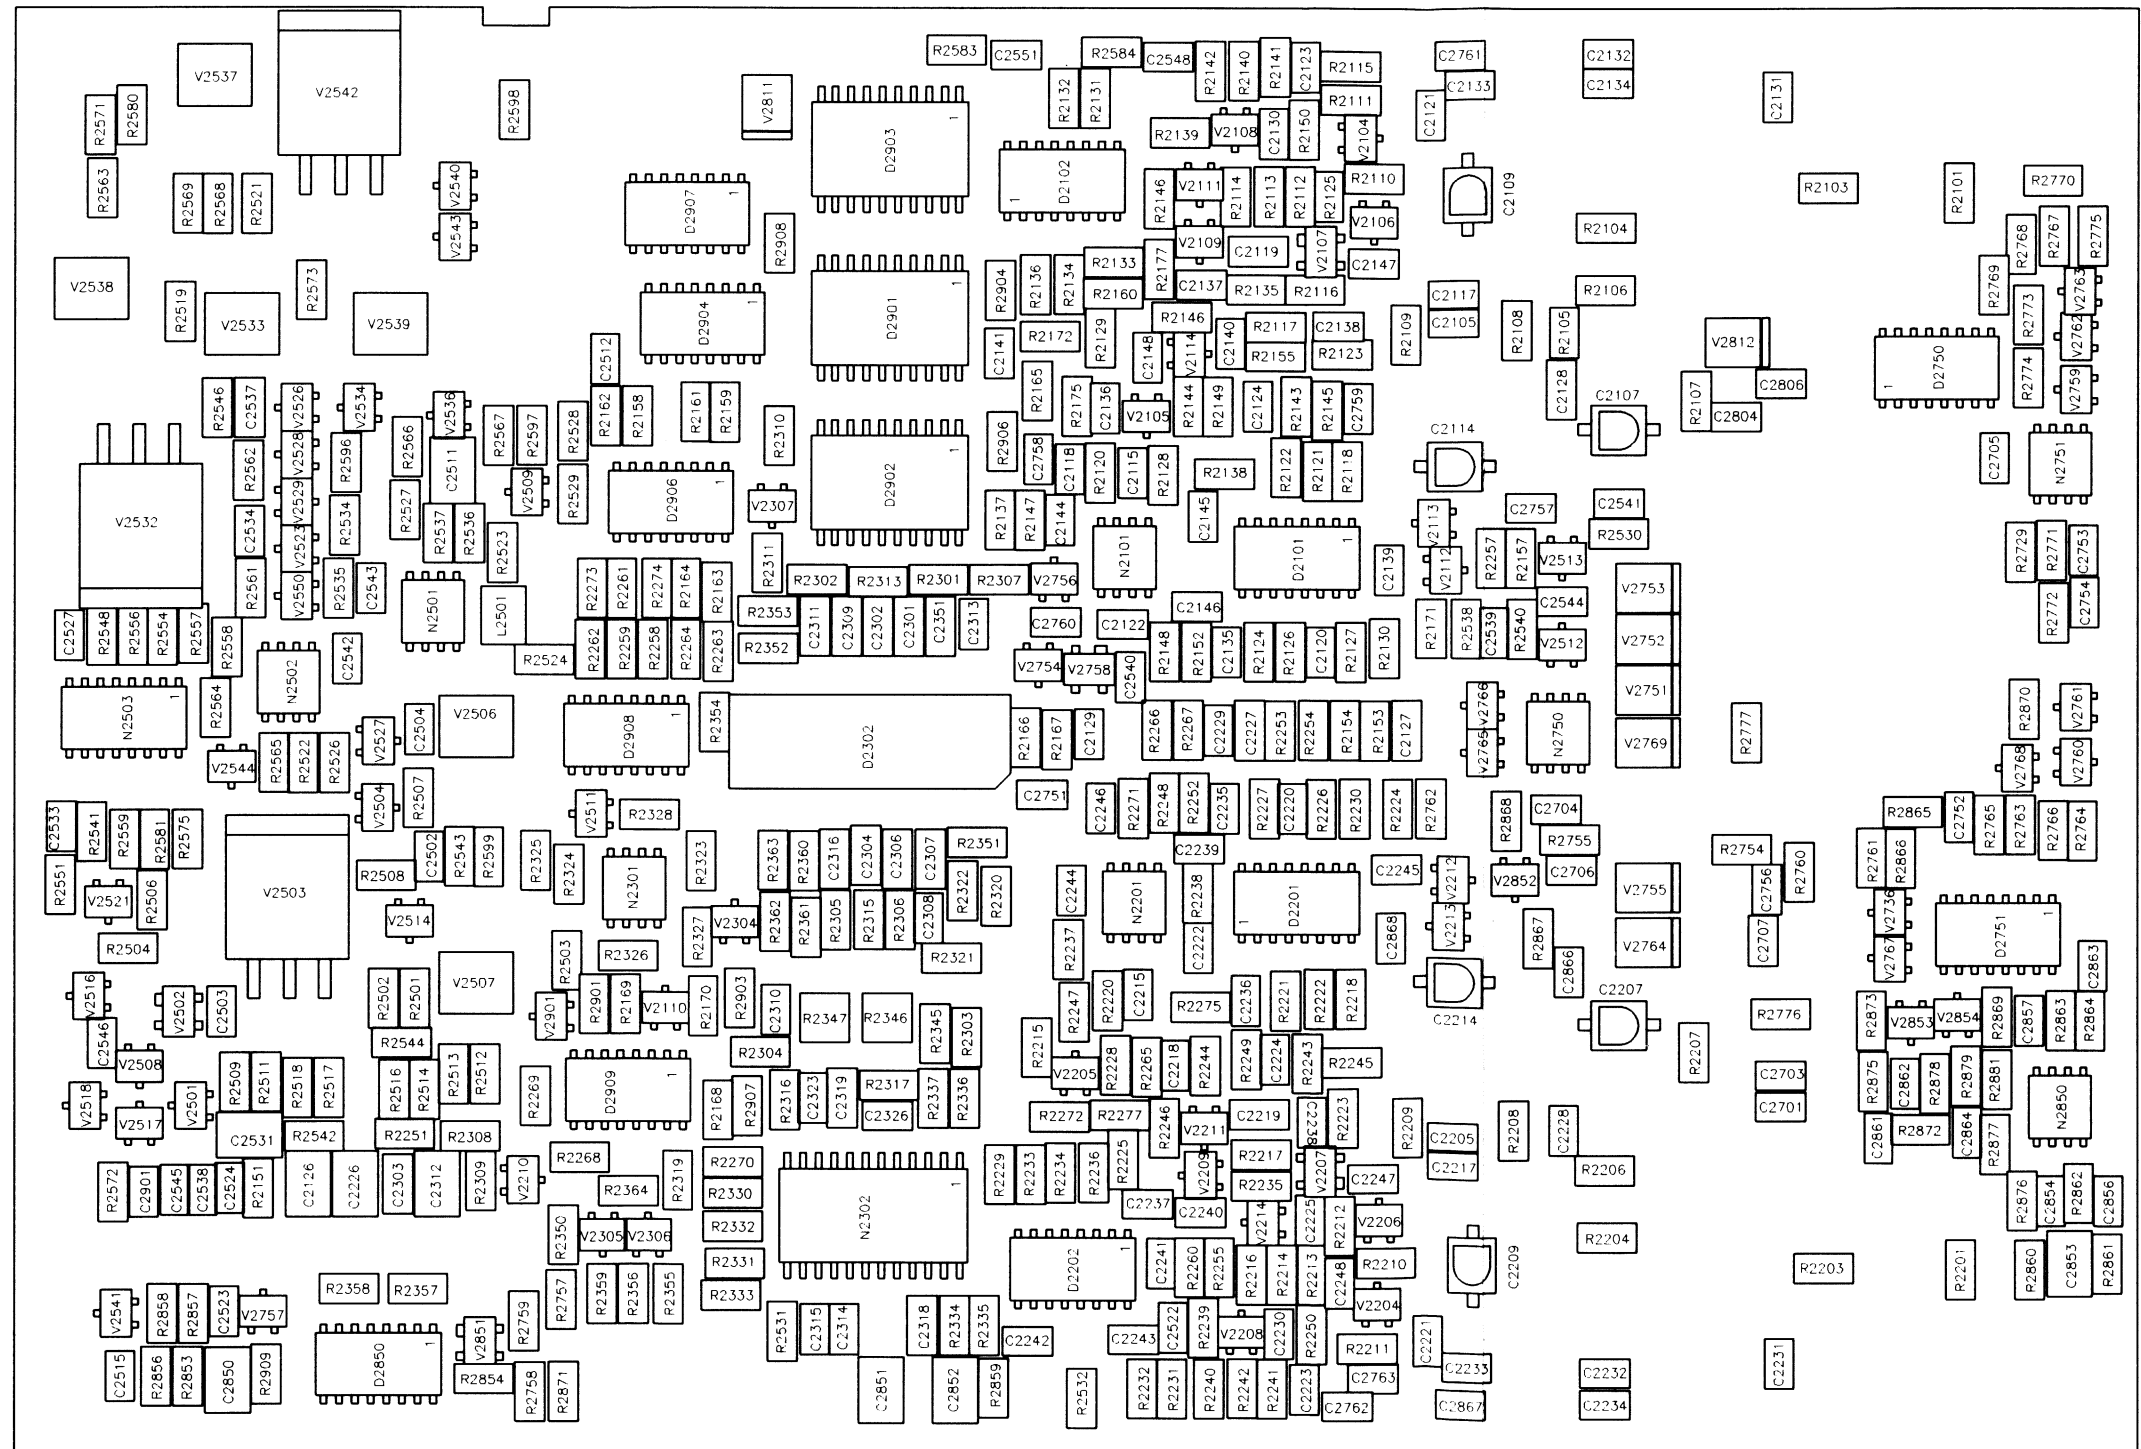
Analog A2 PCB assembly (SMD components side is identical for all models)
